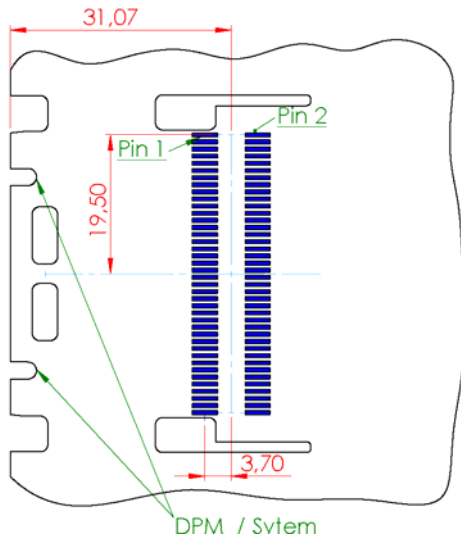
Footprint for Carrier Board for 80 pin netJACK Modules
